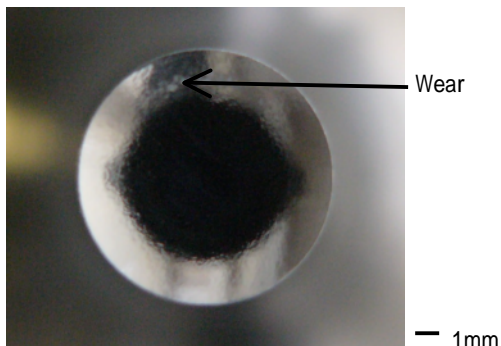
Photograph of the defective lower pestle coated by hard chromium plating.
